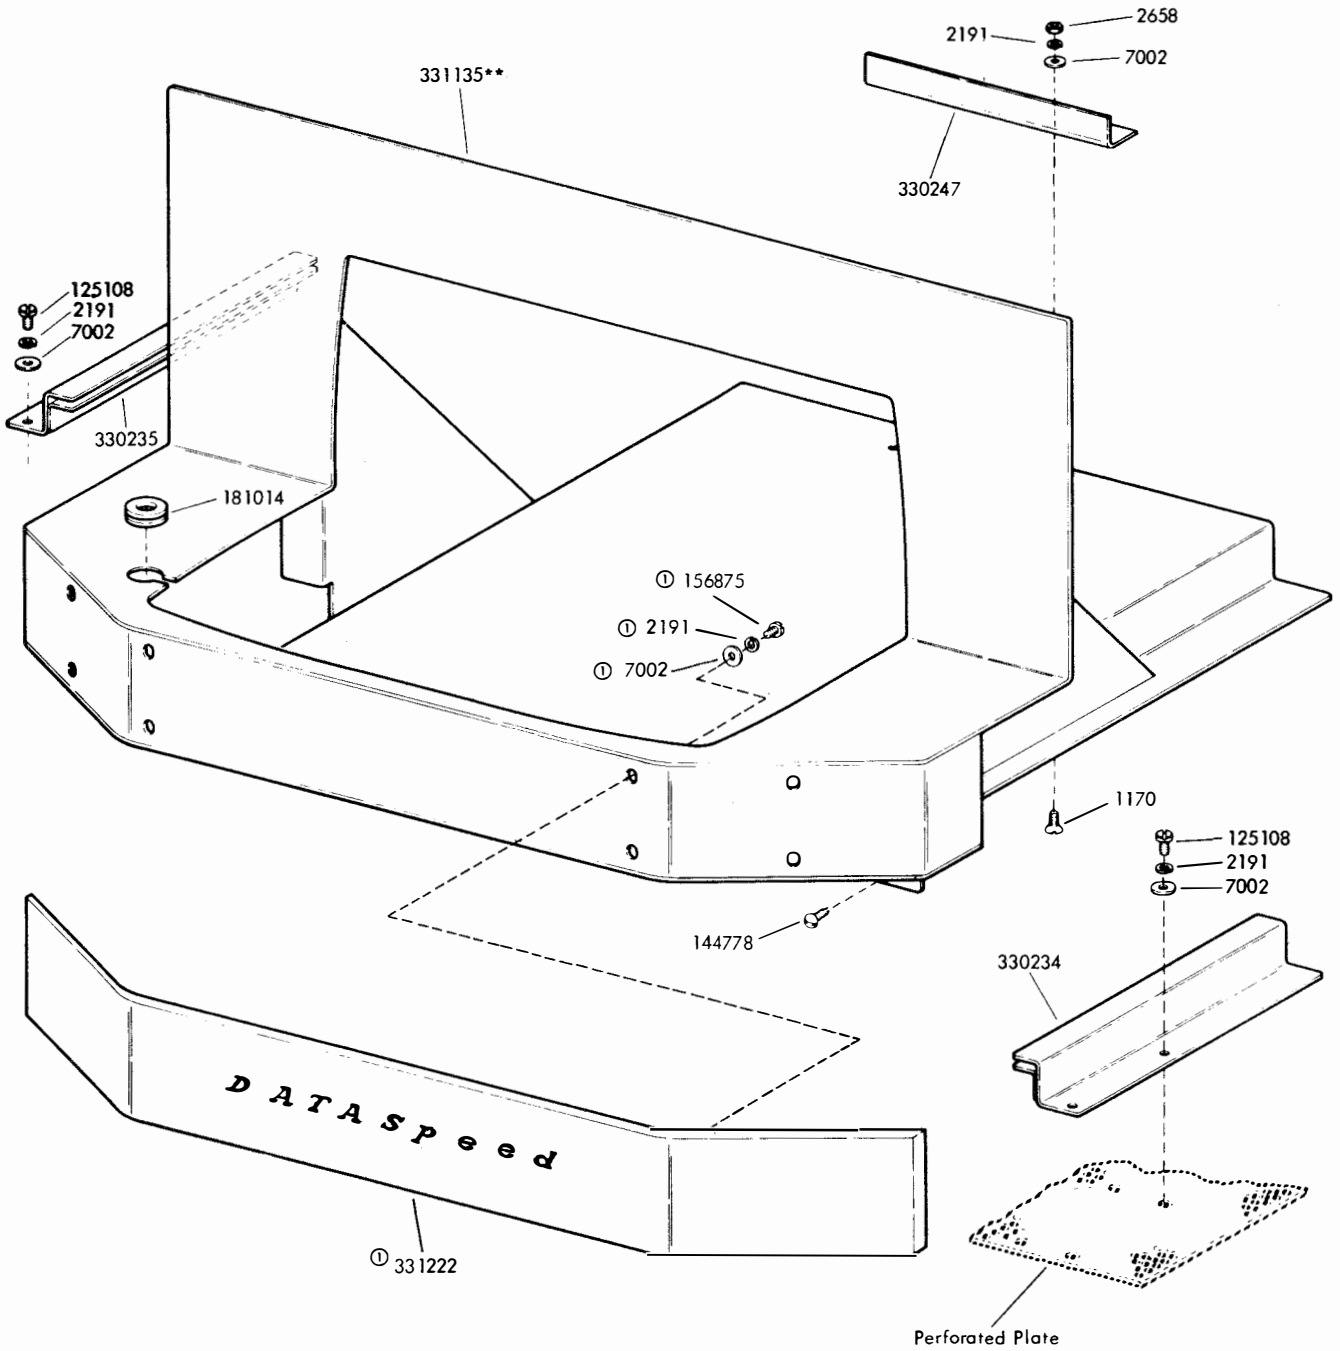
331160\*\* BLANK PANEL ASSEMBLY
